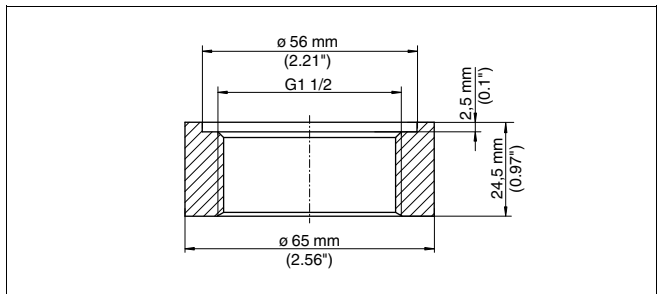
Dimensions welded socket G1½ A acc. to DIN 3852-X
